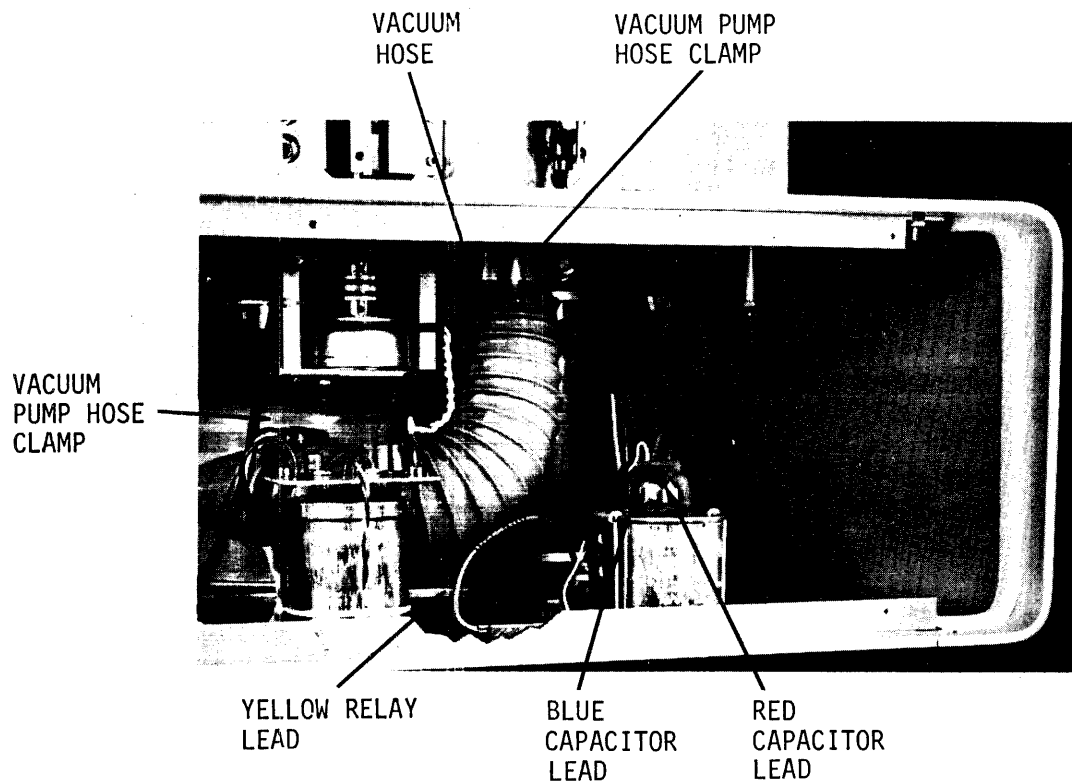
Disconnecting Vacuum Blower Motor Assembly
